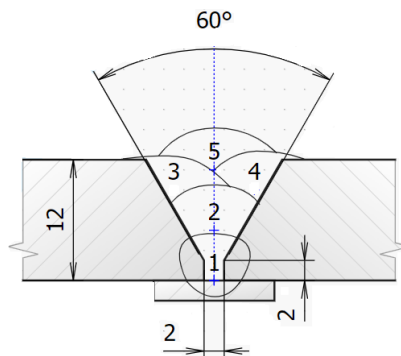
Sketch of the welded joint (1, 2, 3, 4 and 5 – multipass welding)
